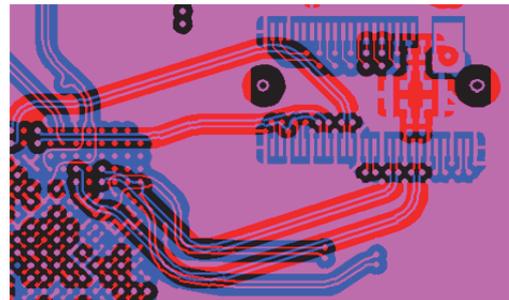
PC Board Wiring Pattern to CFP4 Connector
